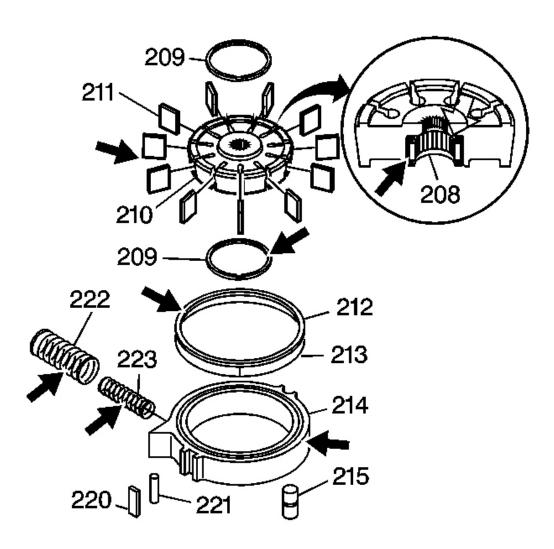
Oil Pump Components Inspection Courtesy of GENERAL MOTORS CORP.
